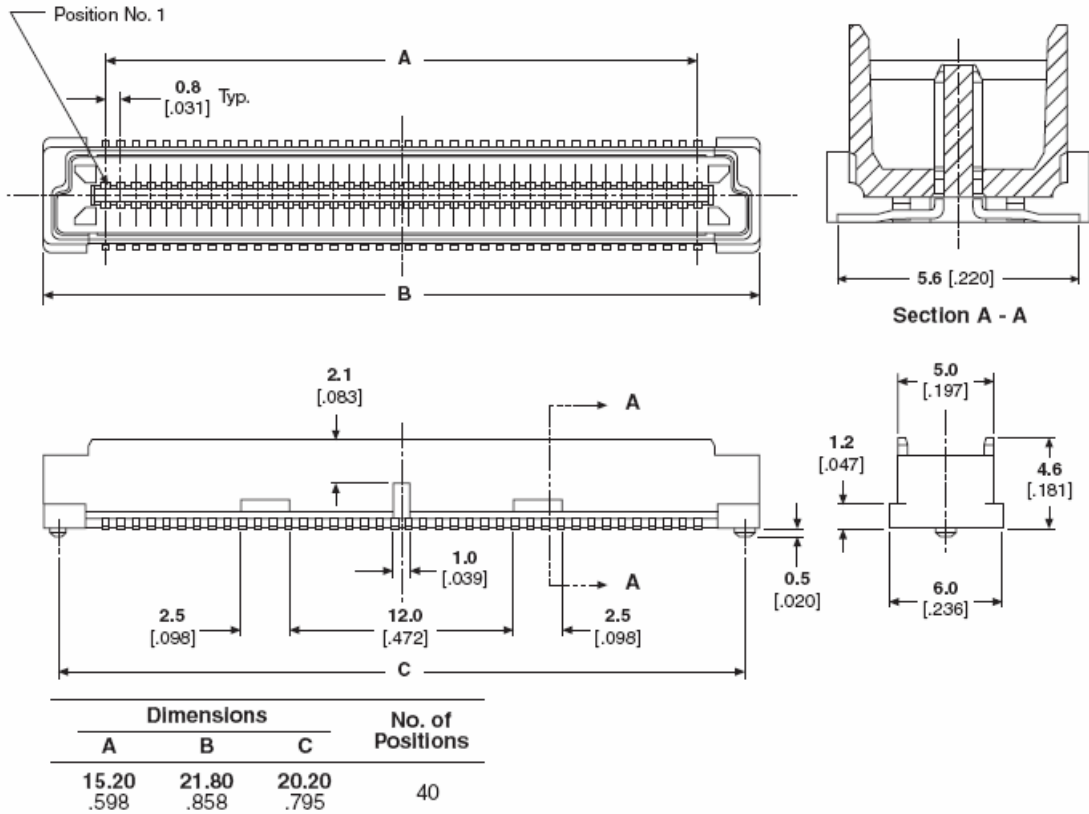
Mechanical drawing of TYCO 517230-1 connector
